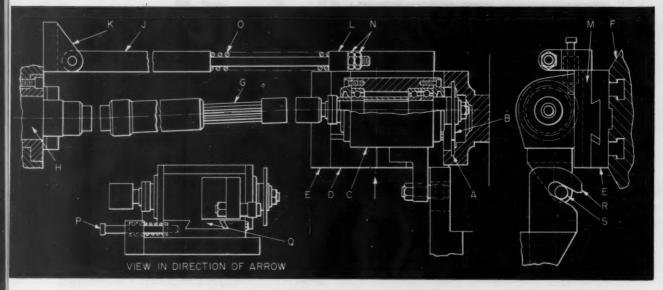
A milling cutter is driven from a live spindle to under-cut the rear of the gear diameter.
